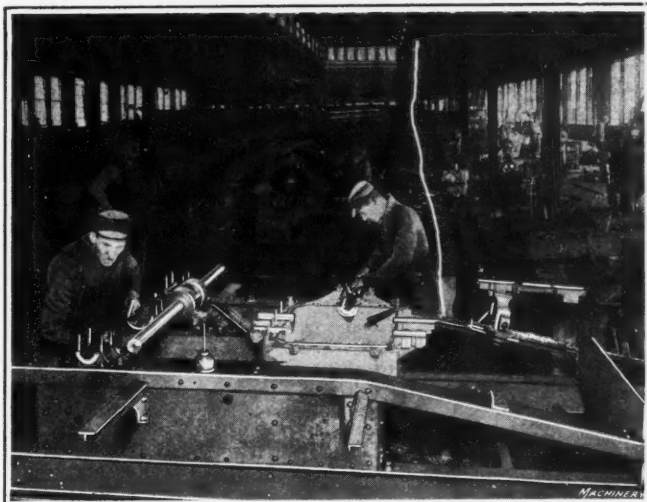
Scraping Bearings for 75- and 120-horsepower Tractors
